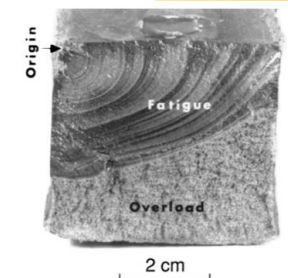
Fracture surfaces for fatigue and final brittle fracture in an 18 Mn steel member. (Photo courtesy of A. Madyski, Westinghouse Science and Technology Ctr., Pittsburgh, PA.)
